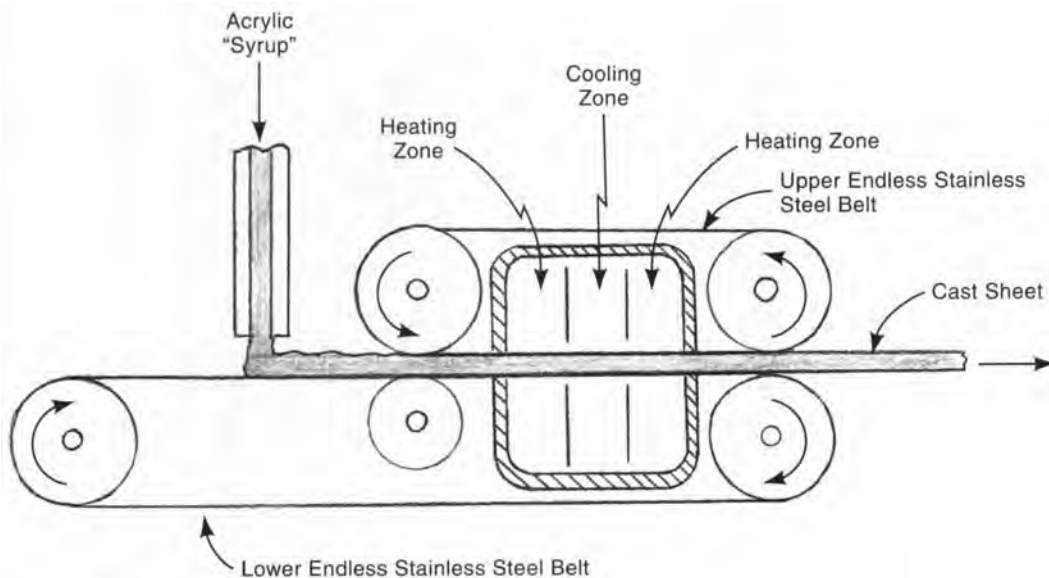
H1b Schematic view of equipment used for the continuous casting of acrylic sheet. The acrylic syrup is spread and compressed between two polished stainless steel belts, which carry it through a series of ovens that polymerize the acrylic by heating, cooling, and reheating to produce a solid cast sheet. (Note: For convenience of illustration, the heating and cooling zones are shown much shorter than those in actual production equipment.)
